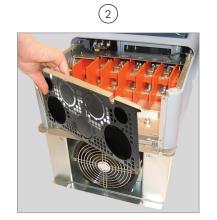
Removal of the cable passage plate - frame sizes D and E
